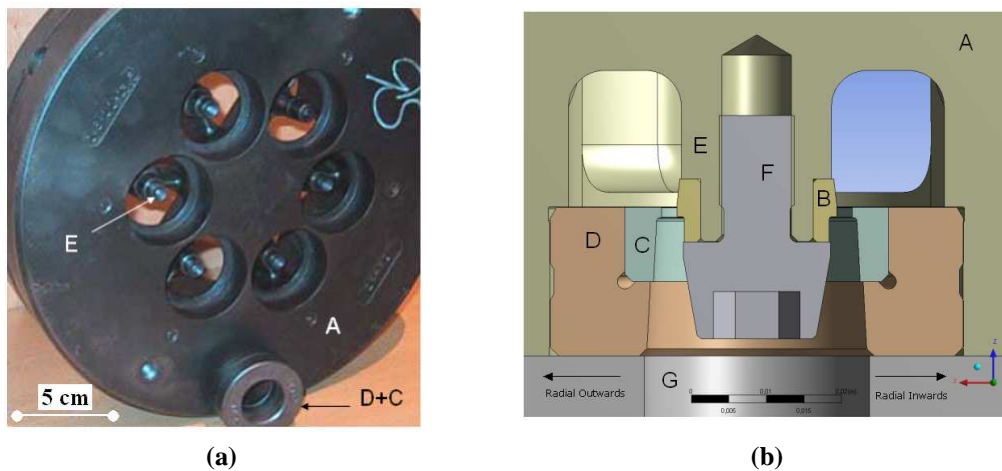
Details (a) and assembling (b) of a base tube die for base tube extrusion.
